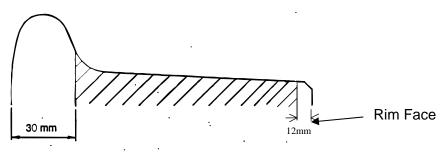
Class 1 rolling contact fatigue crack zone
